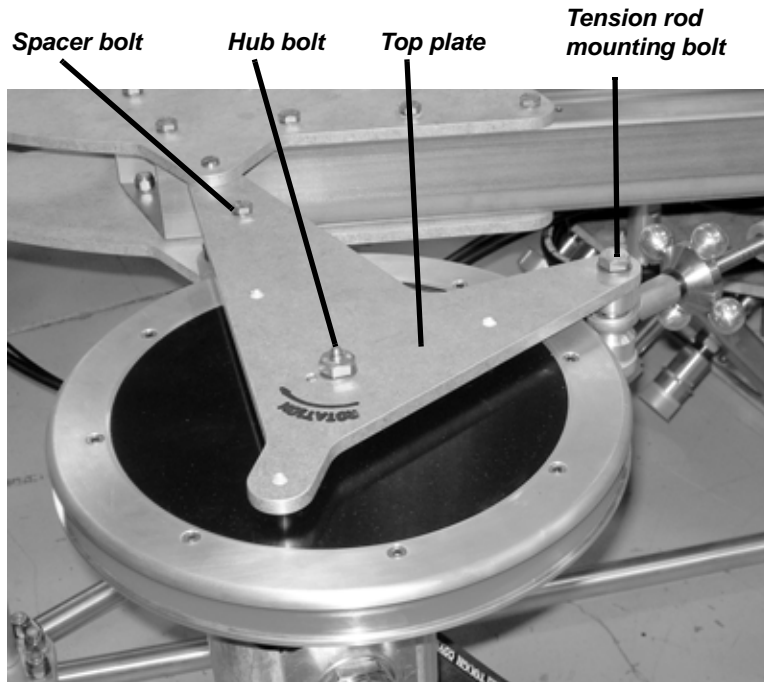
Remove the nut (on the bottom) of the tension rod mounting bolt, and remove the bolt.
